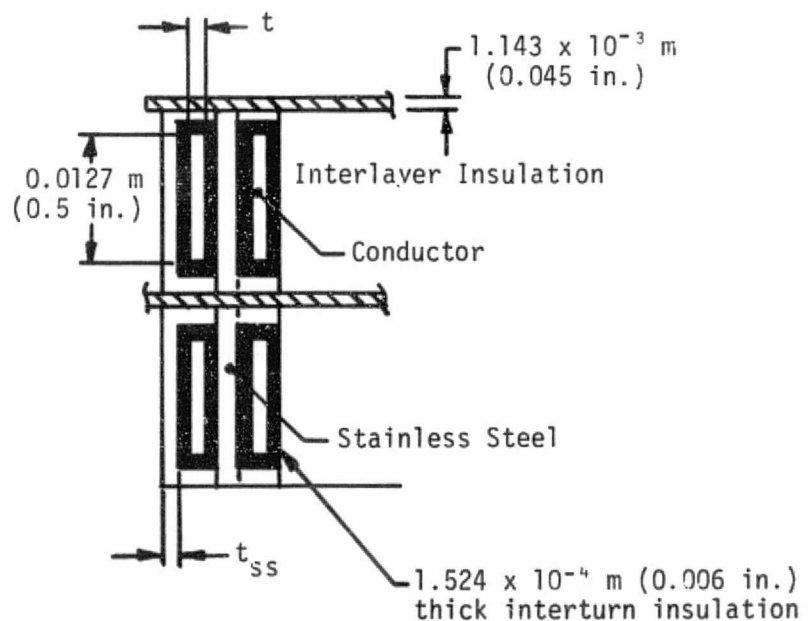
Winding Final Dimensions and Constructional Detail for Preliminary Design No. 2
